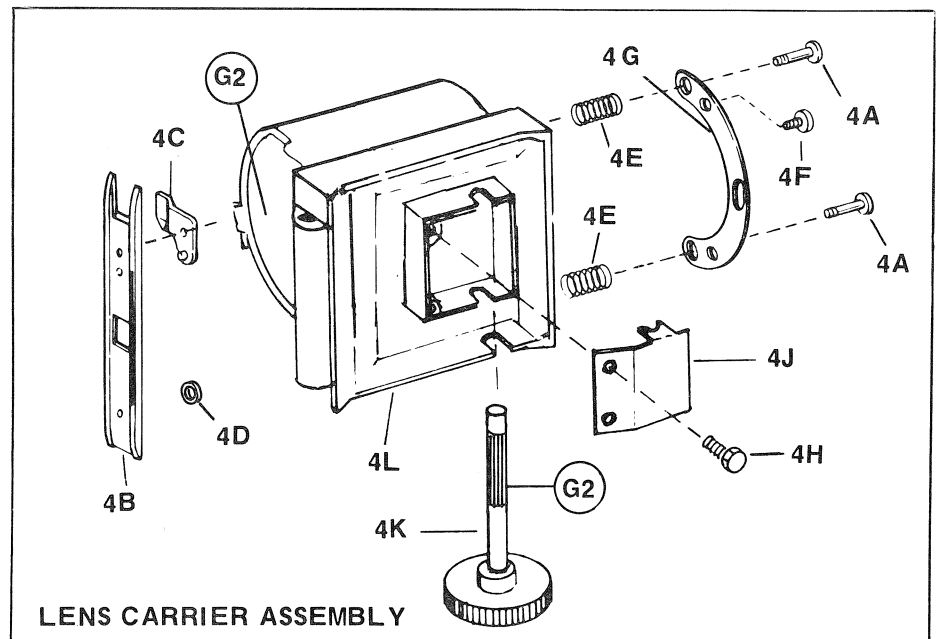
MECHANISM ASSEMBLY VIEW I
